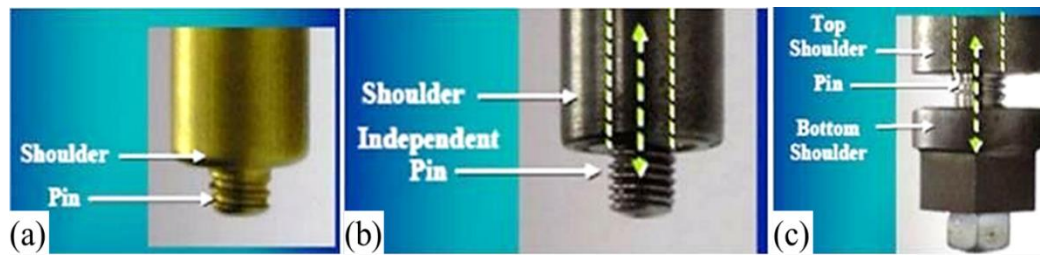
Types of FSW tool (a) fixed (b) adjustable (c) bobbin type [175]
